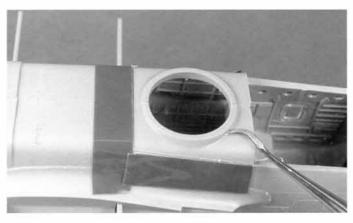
To cut out fuselage sections, set labeling tape along the edges of cut lines and use Bare Metal Foil's plastic scriber to cut through the plastic.
